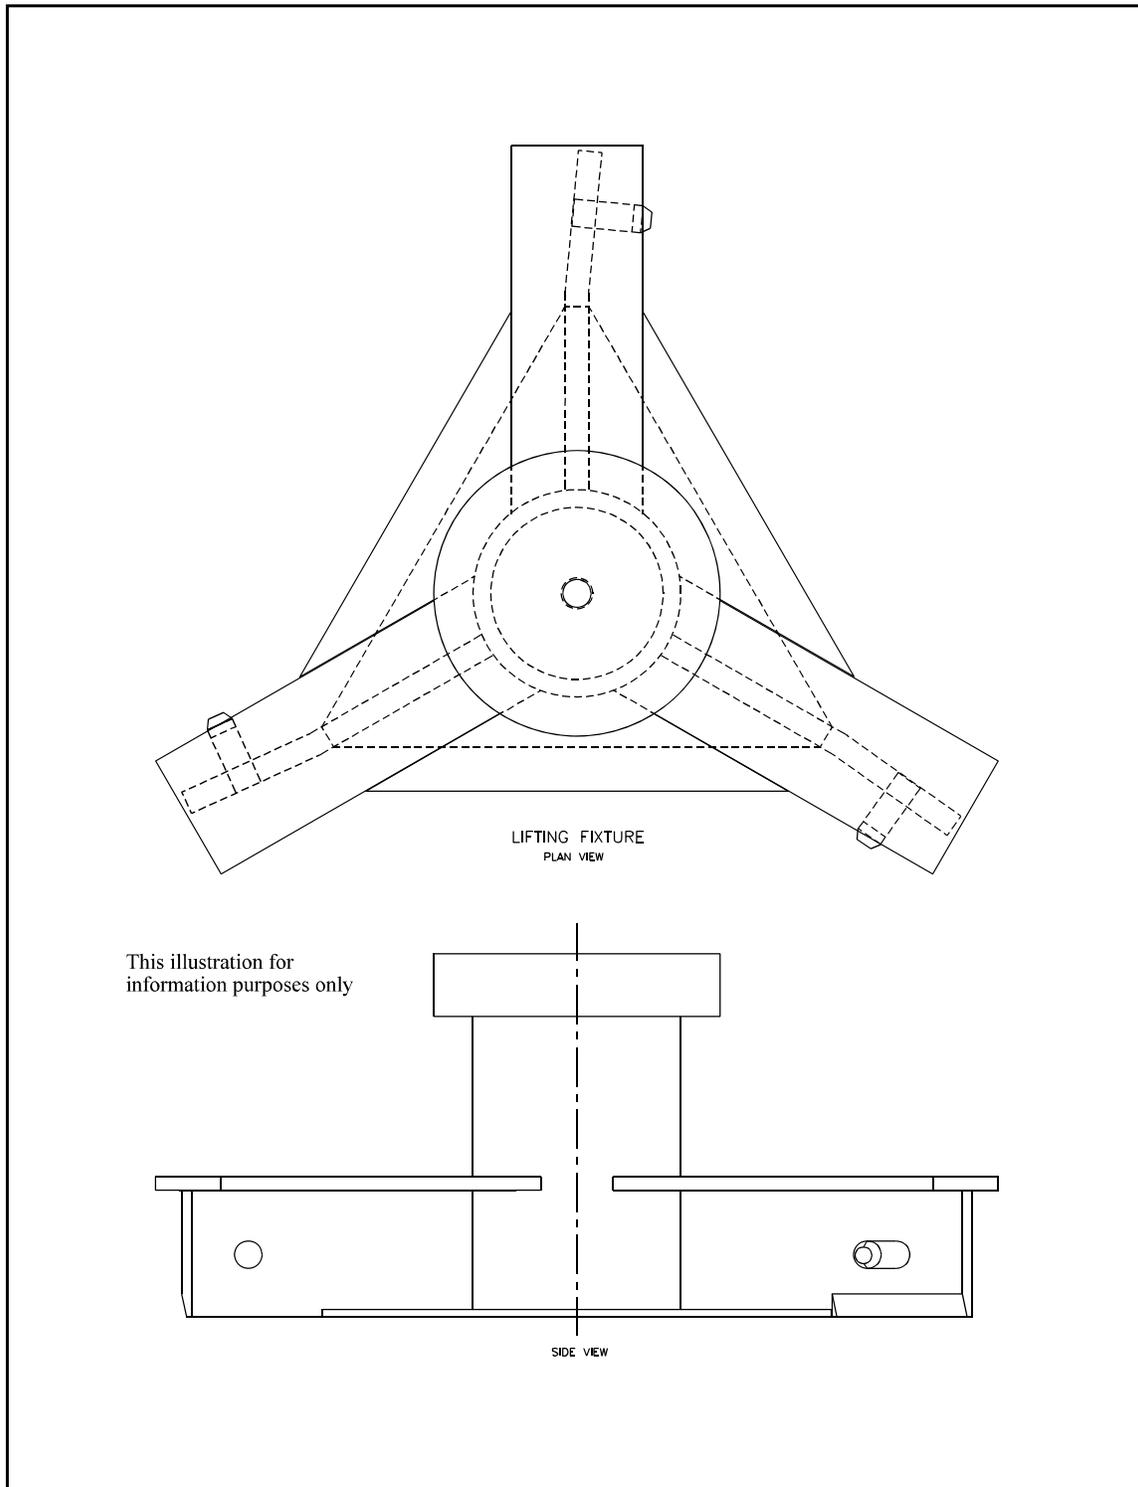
, 10-160B Shipping Cask Lid Lifting Fixture
